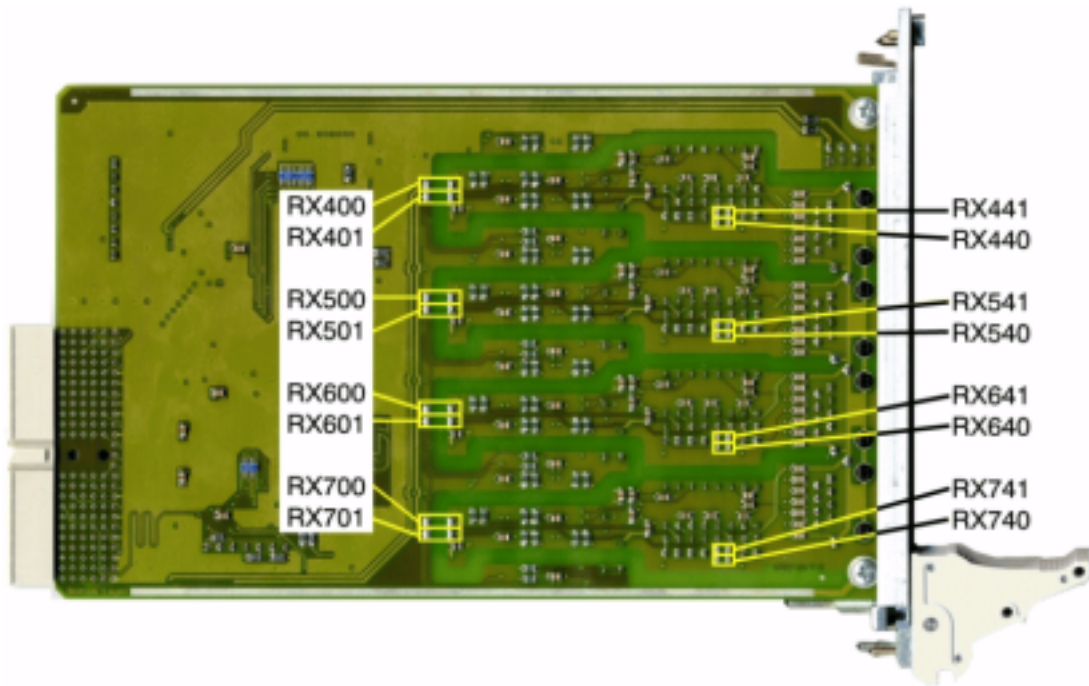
Position of the solder bridges at the bottom layer of the PCB
